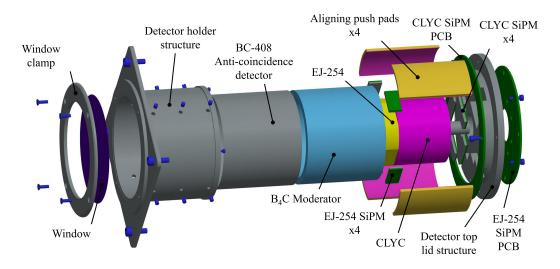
Exploded view of the ALIGN payload structure, showing the major detector components and support assemblies.
